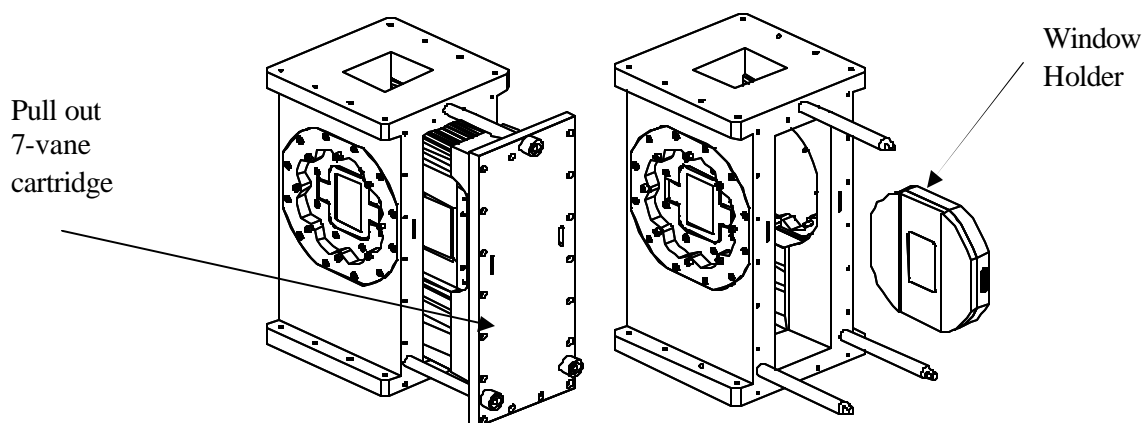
Drawing of the new amplifier head assembly
